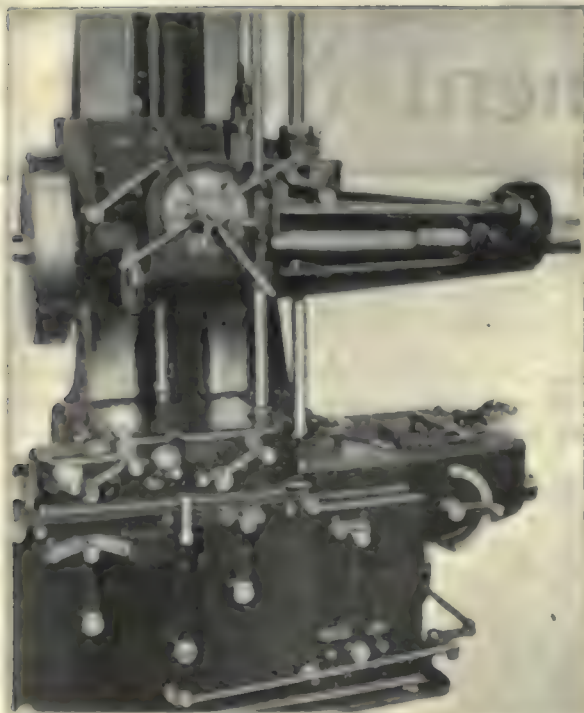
CLOSE-UP VIEW OF OPERATING LEVERS
